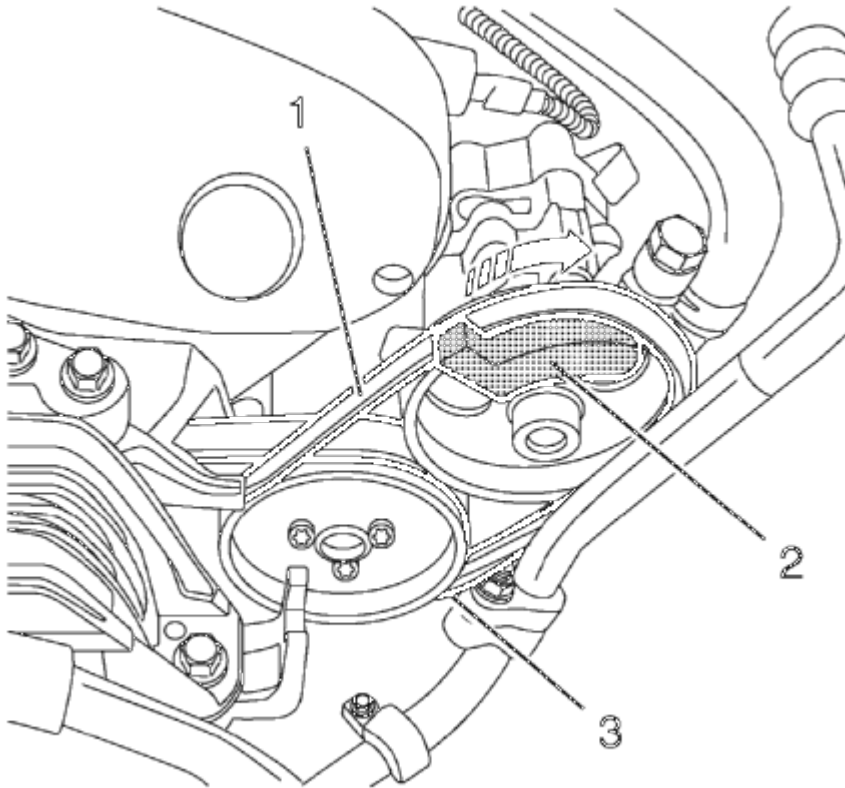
Power Steering Pump Belt, Installer & Water Pump Pulley
